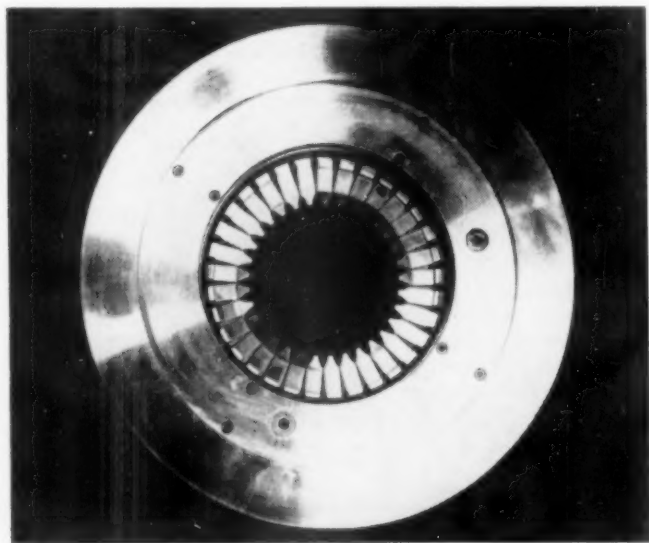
This tool head, used in the shear-speed technique, locates the tools in correct position to form the teeth.
